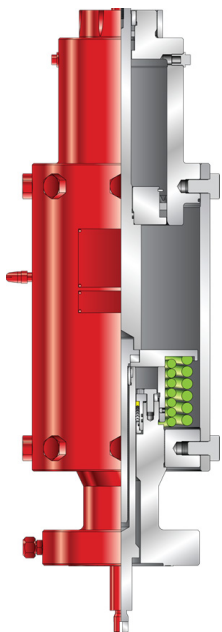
NOV's new type hydraulic actuator. The actuator's stem packing stack is contained in a packing retainer assembly that can easily be removed from the bonnet without needing to remove the bonnet itself.
